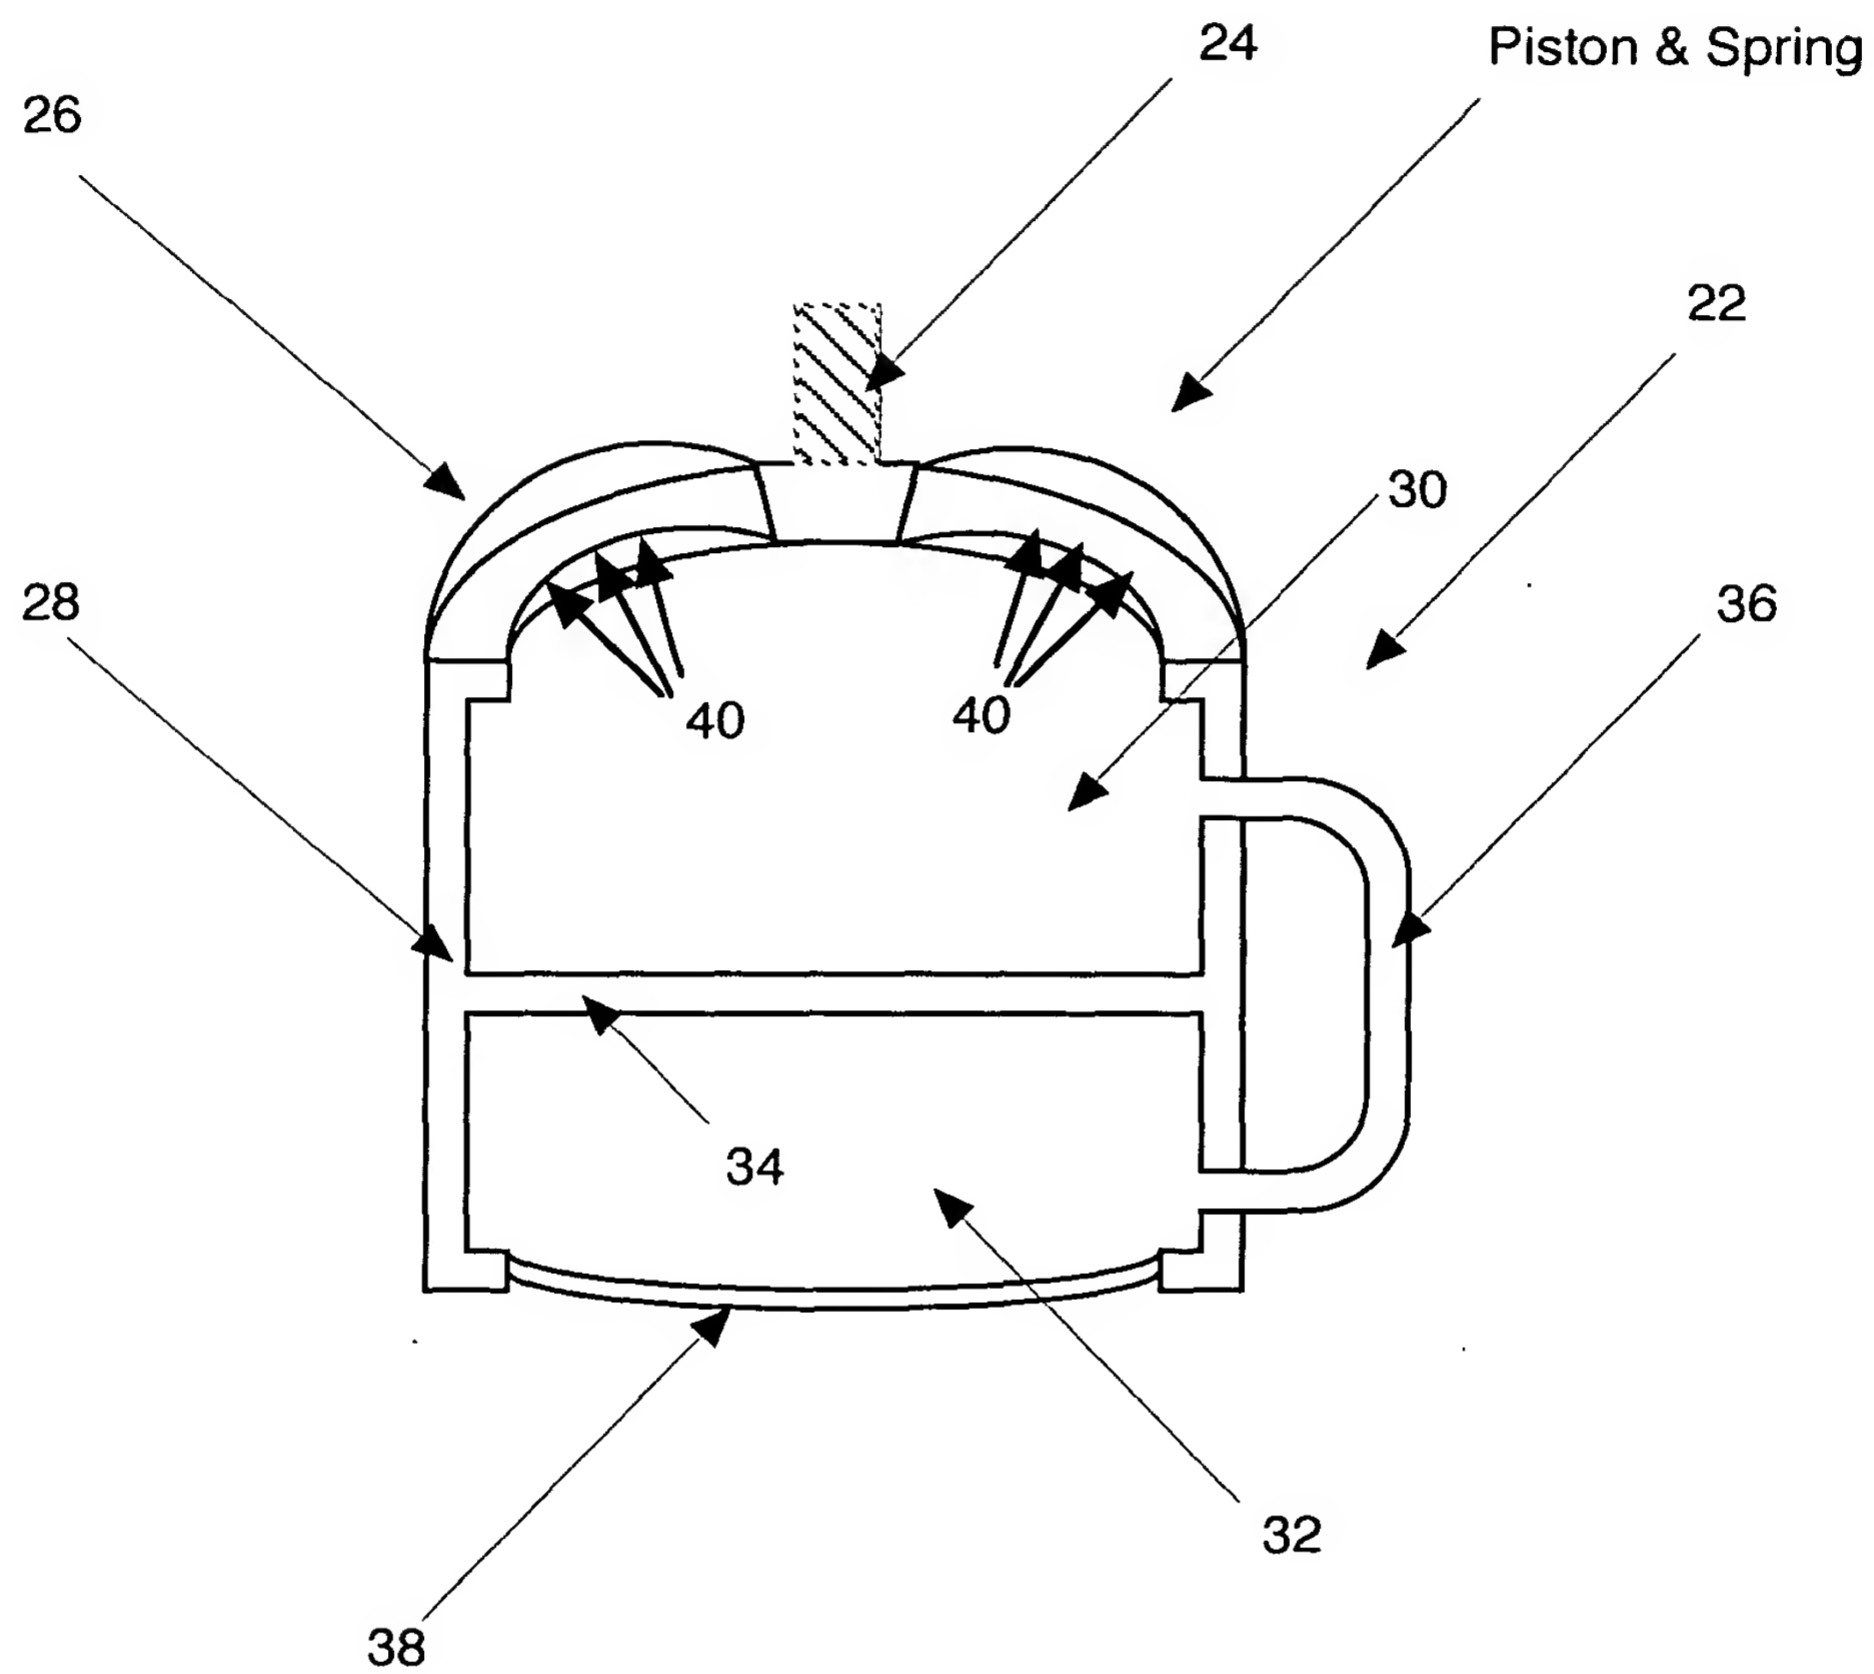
Construction of Typical Existing Hydromount w/ Alternate Construction (Prior Art)
